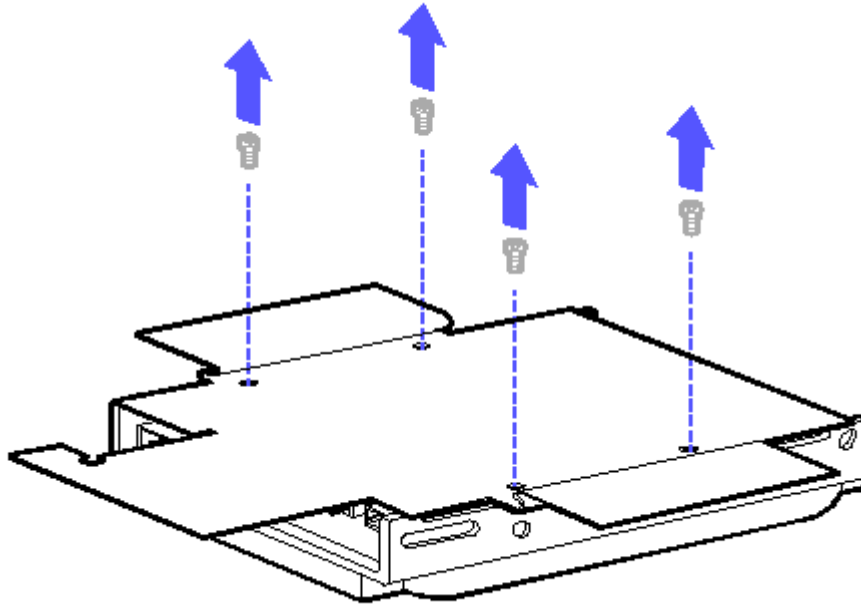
Removing the Screws from the Flexible Ground Shield
